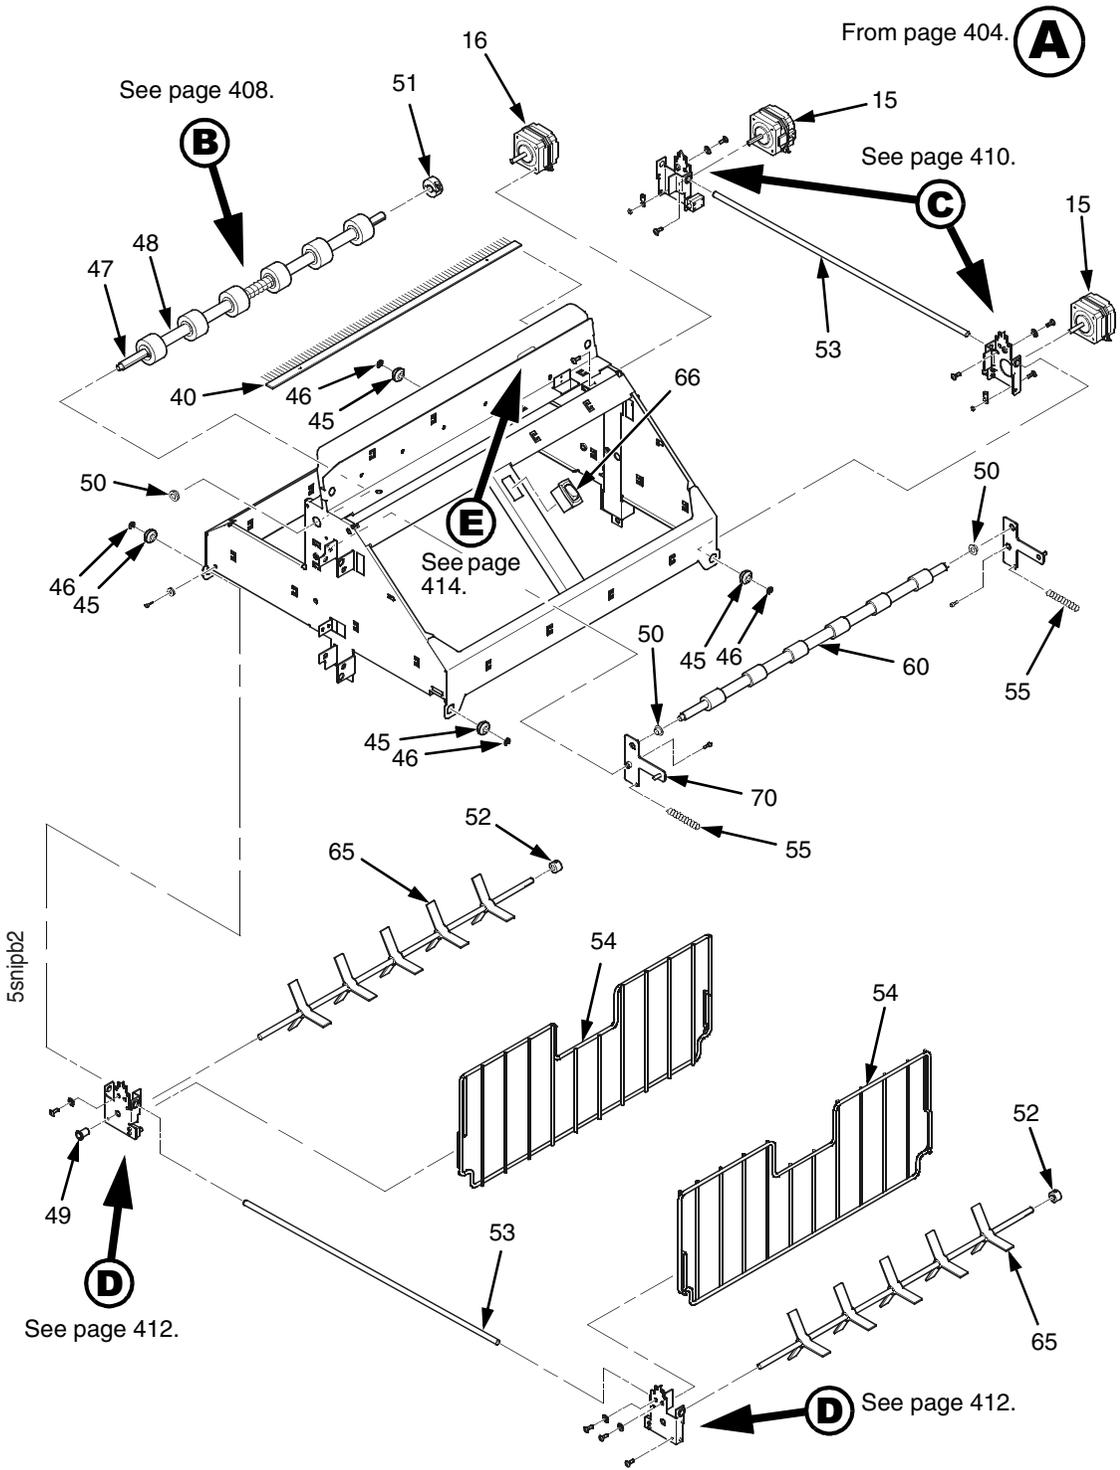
Elevator Detail: Motors, Rollers, and Paddles
